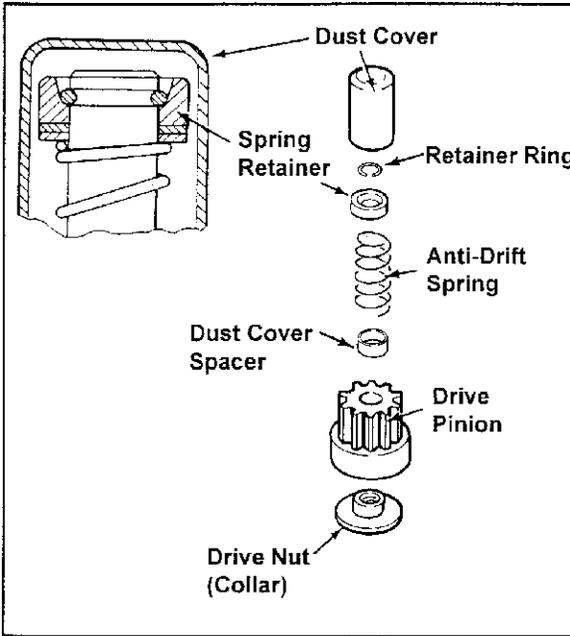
Drive Components, UTE "Bonded" Inertia Drive Starter.
